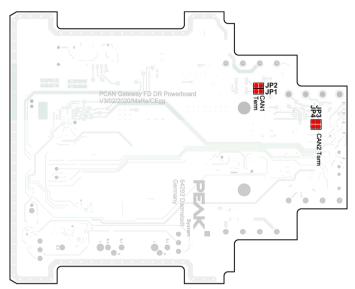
Bottom side of the power board with the solder fields to activate the internal termination
